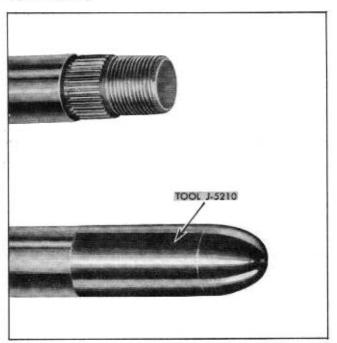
Tool J-5210 Installed on Steering Shaft
